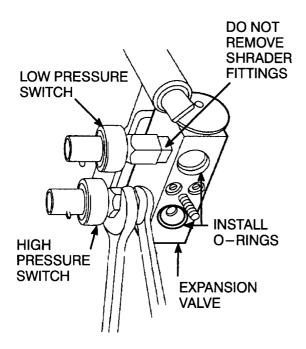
Use Backup Wrench When Removing/Installing Pressure Switches
